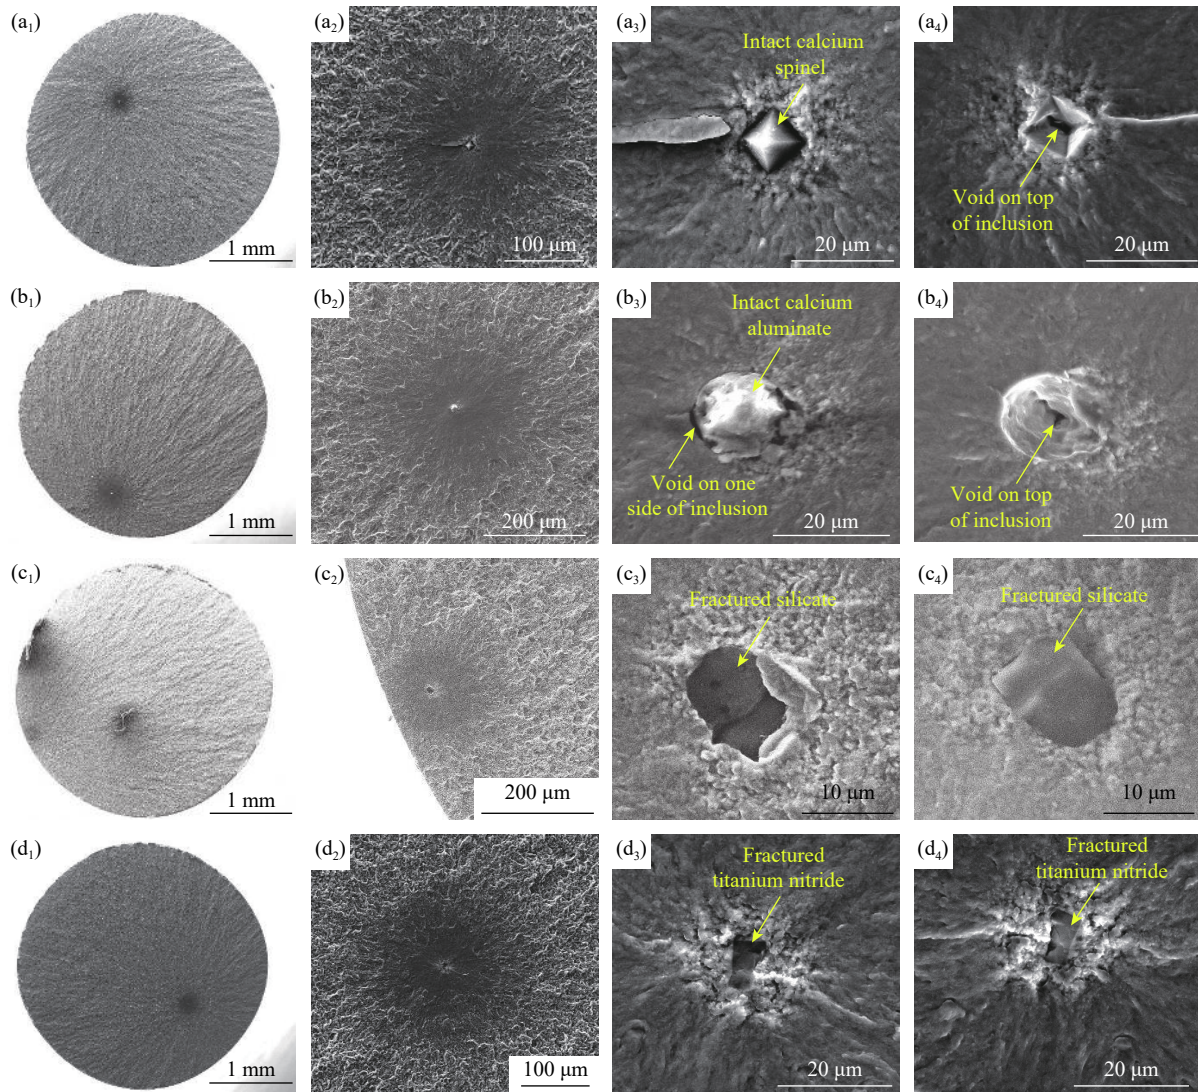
Morphologies of fatigue fracture surfaces with inclusions: (a₁–a₄) spinel [35]; (b₁–b₄) calcium aluminum; (c₁–c₄) silicate; (d₁)–(d₄) titanium nitride (reproduced based on Ref. [31]).
